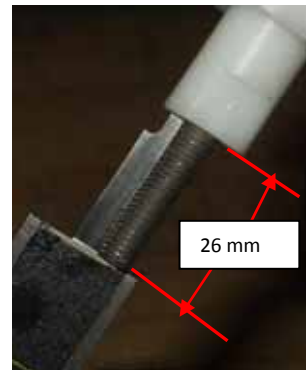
Front and Rear Spring Adjustment if Front Angle cannot be Held
